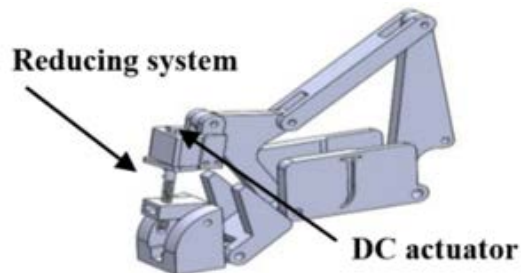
CAD model of the underactuated robotic finger, showing its dimensions.
